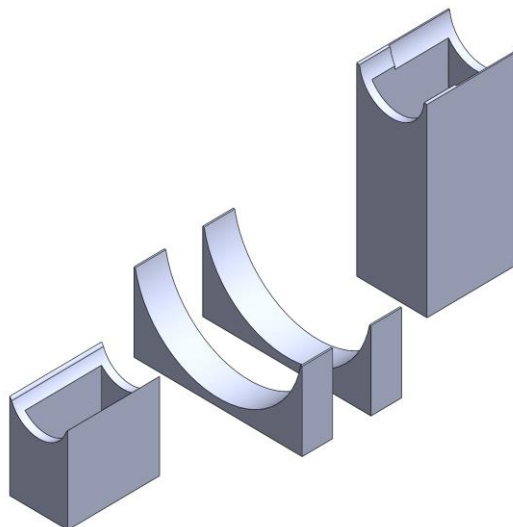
Cradles for (from left to right); main motor, cylinder, and pin mill motor.
